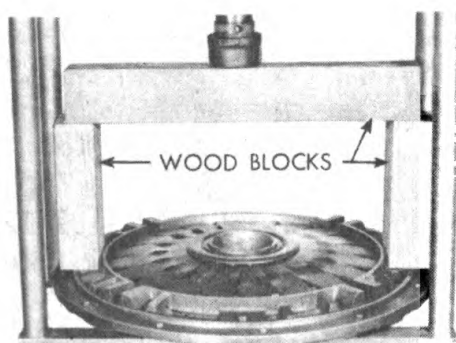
Compressing Clutch Pressure Spring for Pressure Plate Removal
